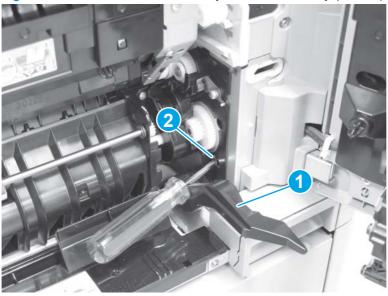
Remove the secondary transfer assembly (8 of 10)
